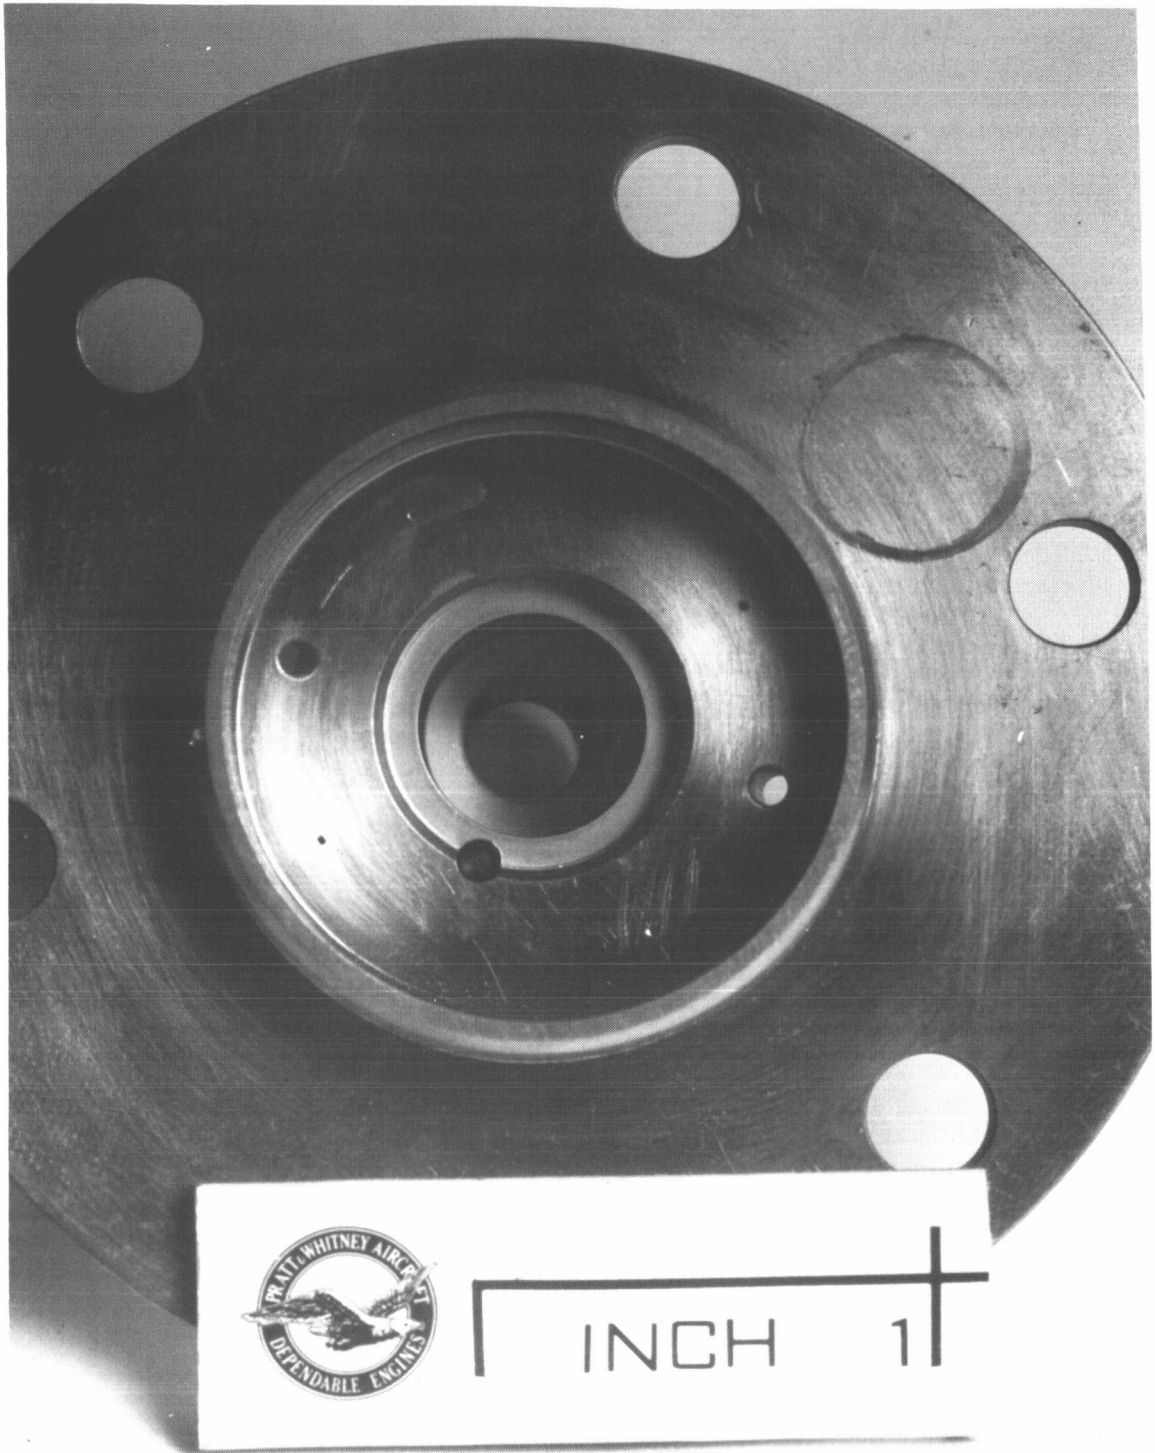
Seal Housing with Bellows Seal Installed (XP-80136)
